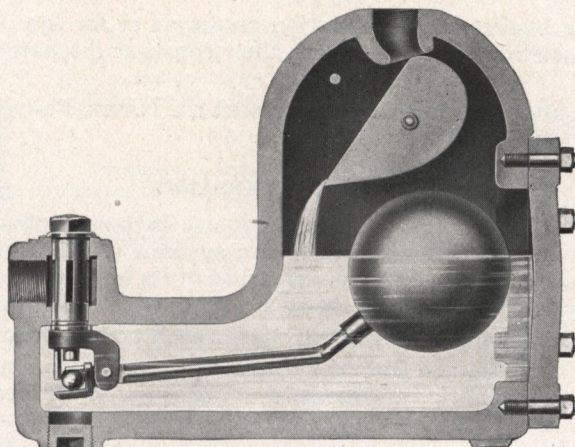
Sectional View showing Bucket Dumping, Valve Discharging
